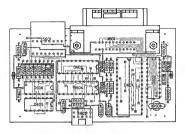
IEC-625/IEEE-488 Interface pcb, lay-out component side
